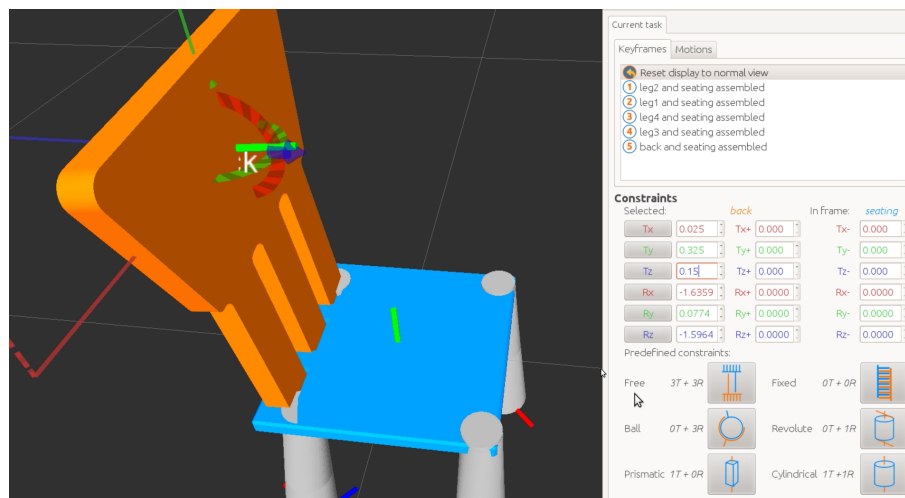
Detailed view of the GUI showing the learned constraints and assembly plan
